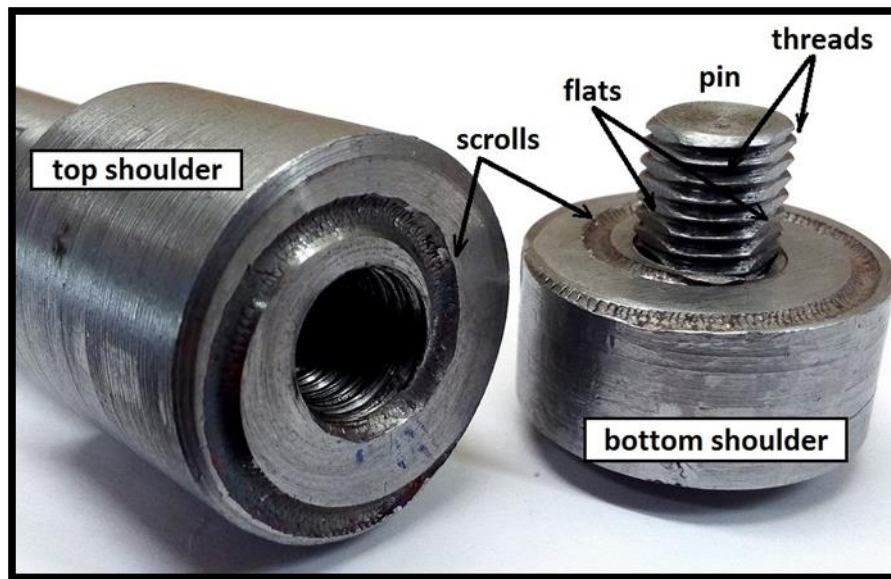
Configuration of the bobbin tool utilized for the AA6082-T6 weld trial.
